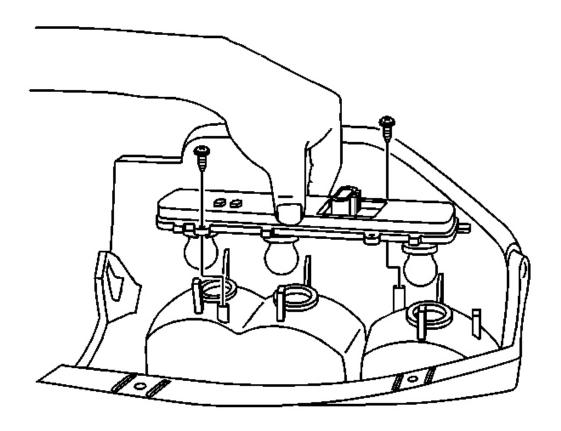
View Of Tail Lamp Circuit Board Courtesy of GENERAL MOTORS CORP.
